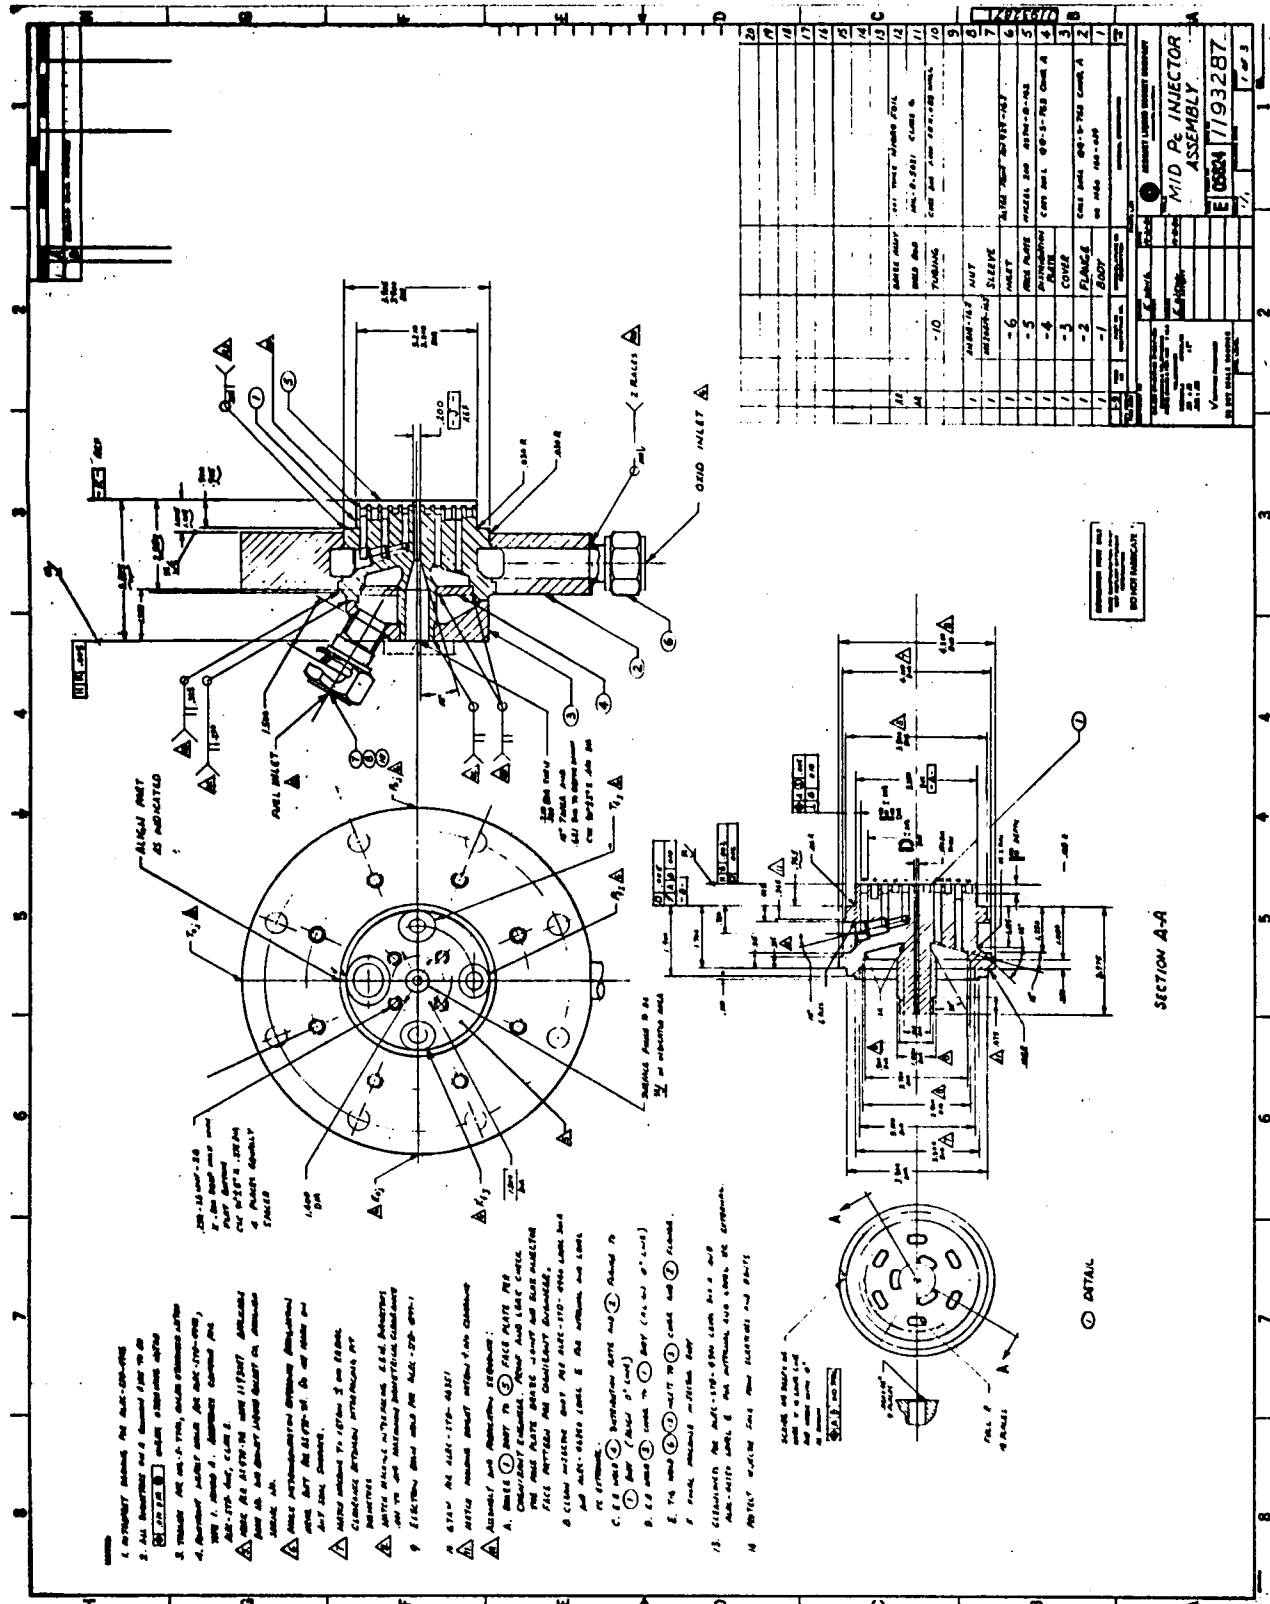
Injector Assembly Engineering Drawing (1 of 3)
